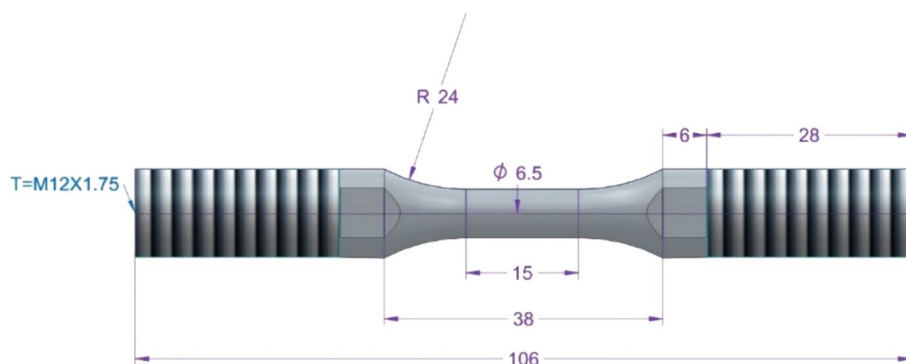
Geometry and dimensions are given in millimeters of the specimen used in the fatigue crack propagation test
